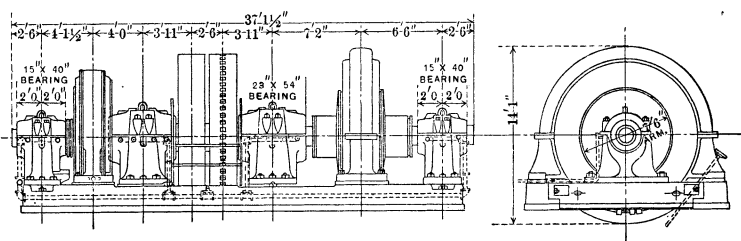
OUTLINE OF FLYWHEEL MOTOR-GENERATOR SET SUPPLYING POWER TO ROLL MOTORS.
